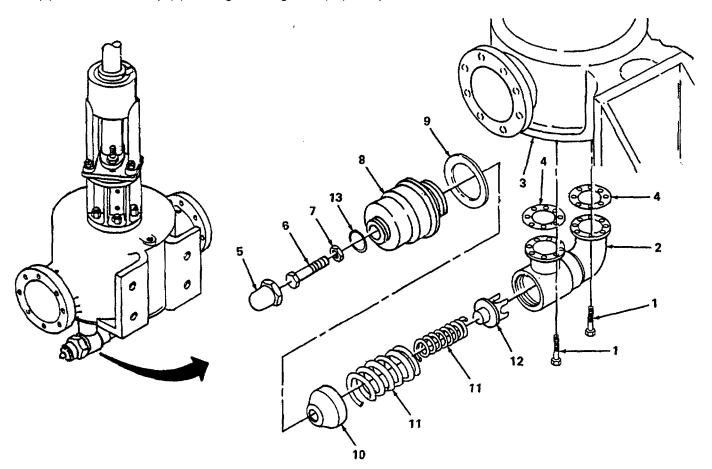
Pressure Gage Relief Valve Removal and Disassembly.
